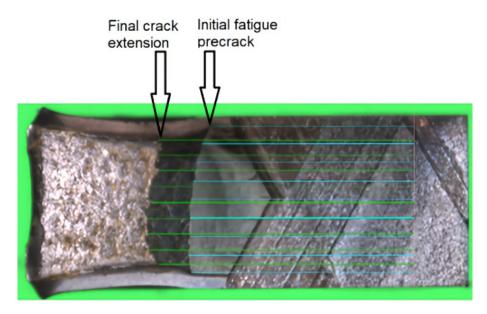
Optical image of a sample after fracture toughness testing with both initial and final crack length measurement.
